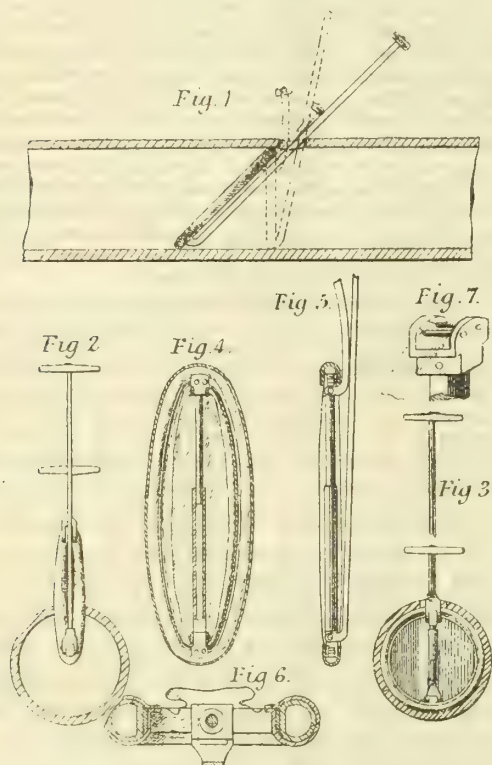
shows the device being applied to a pipe; fig. 2 is a cross section of the pipe, showing the device inserted through a hole in the side; fig. 3, is a similar view, with the device in position; fig. 4 is an enlarged detail of the ring or stopper proper, showing the casing surrounding the tube or packing; fig. 5 is a longitudinal section taken through the ring at one side of the sliding bars; fig. 6 is a cross section; and fig. 7, a perspective detail, showing the end of one of the sliding bars and the pivotal connection of the springs thereto.
